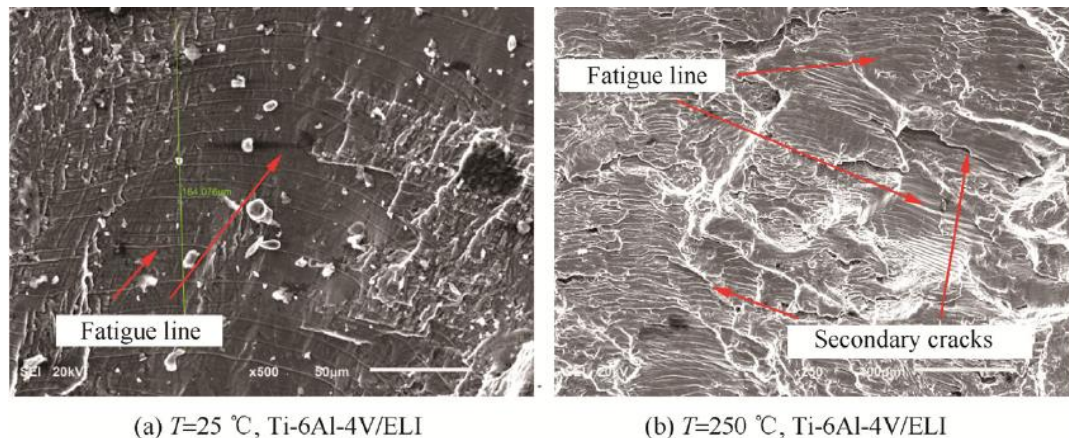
Fractography of a Ti6Al4V fracture surface at 25 °C and 250 °C [8]
